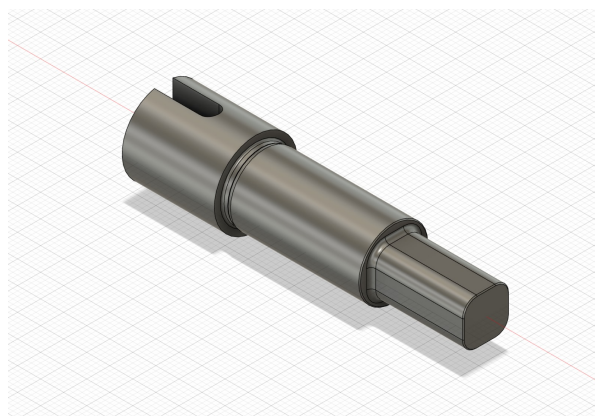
Motor-Wheel Hub shaft, machined out of 6061-T6 aluminum
